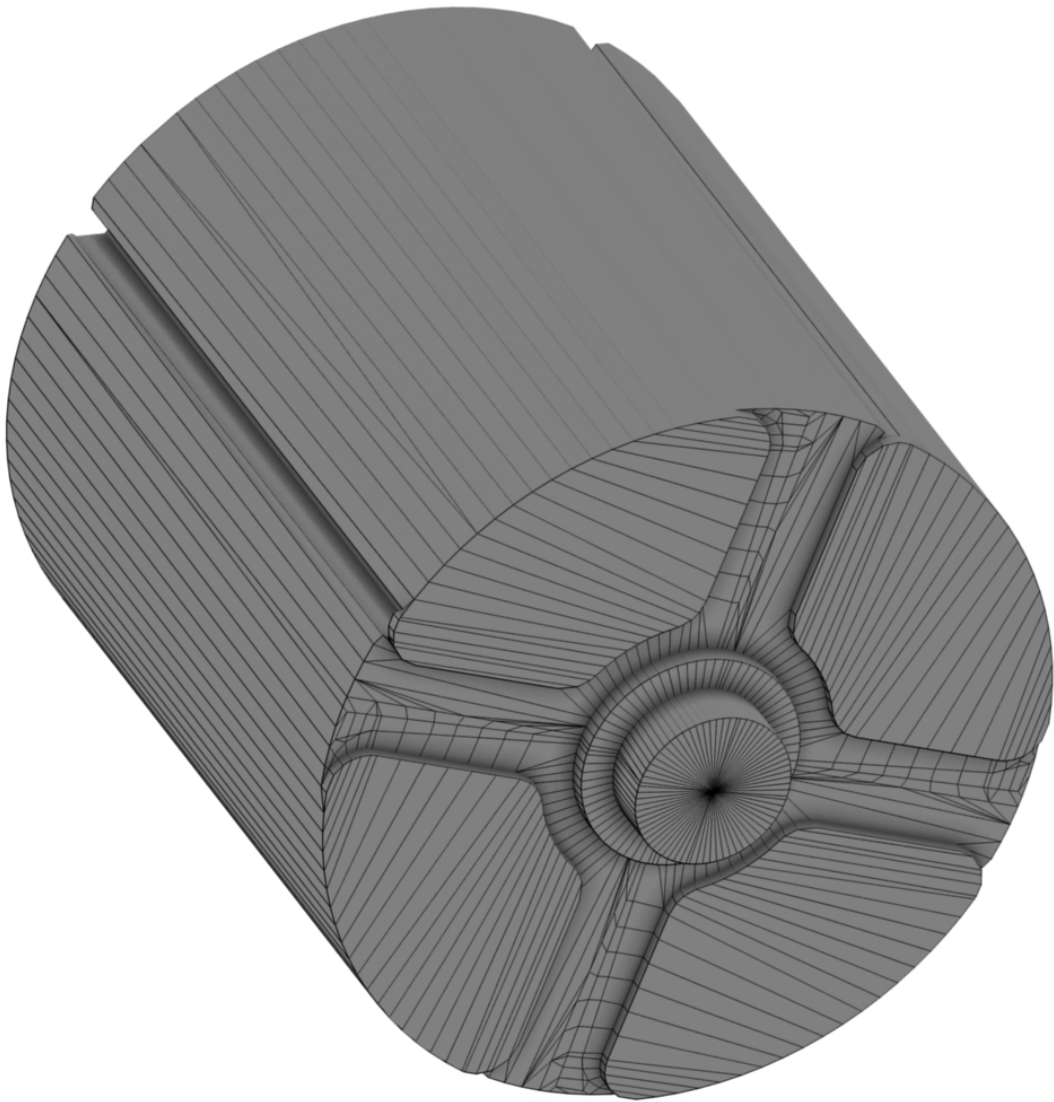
Isometric view of the feed end of the 30 cm mill surface mesh
